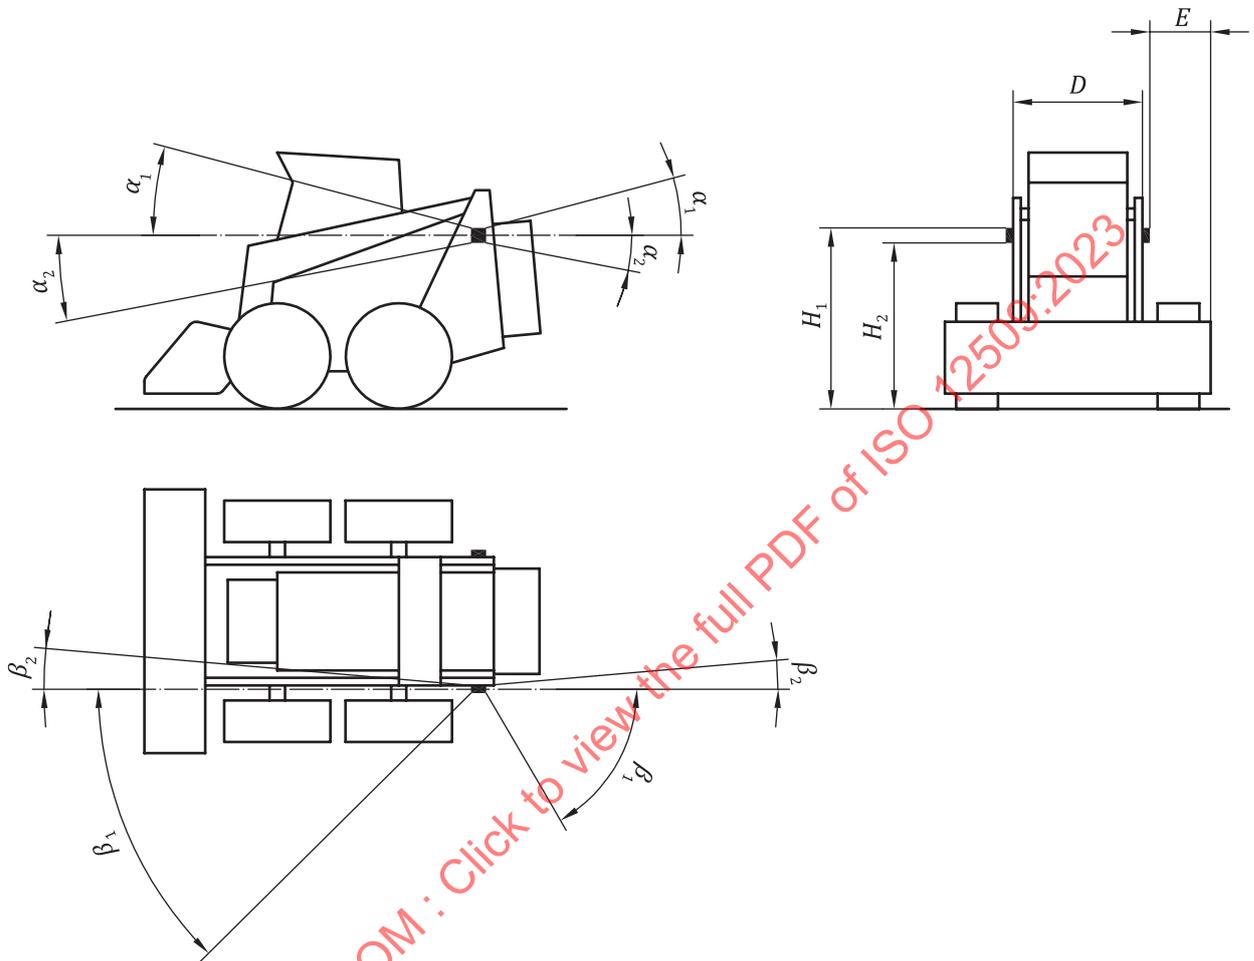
Combined front direction-indicator and rear direction-indicator lamp
